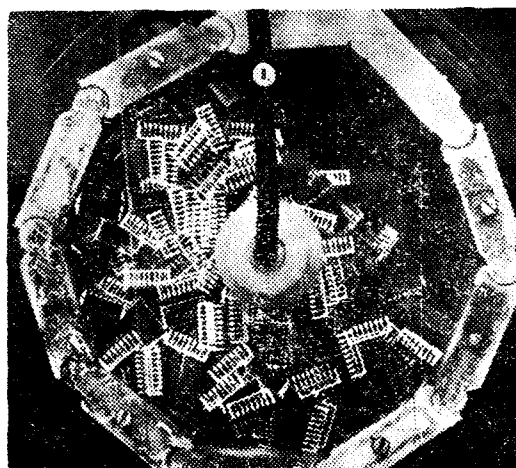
(b) Side view of rotating barrel (B) at r.p.m. 20
